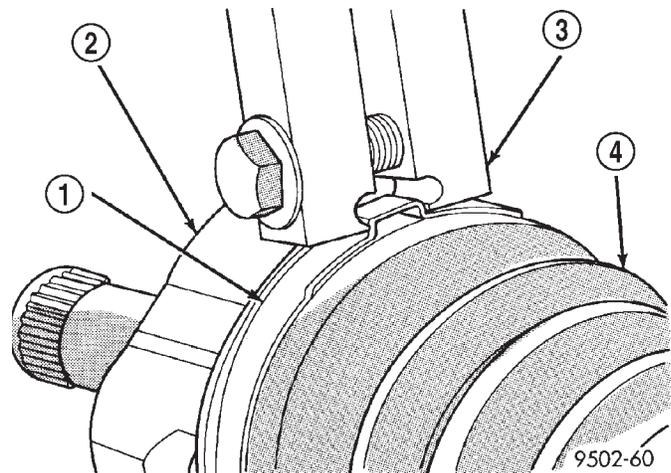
Crimping Tool Installed on Sealing Boot Clamp
